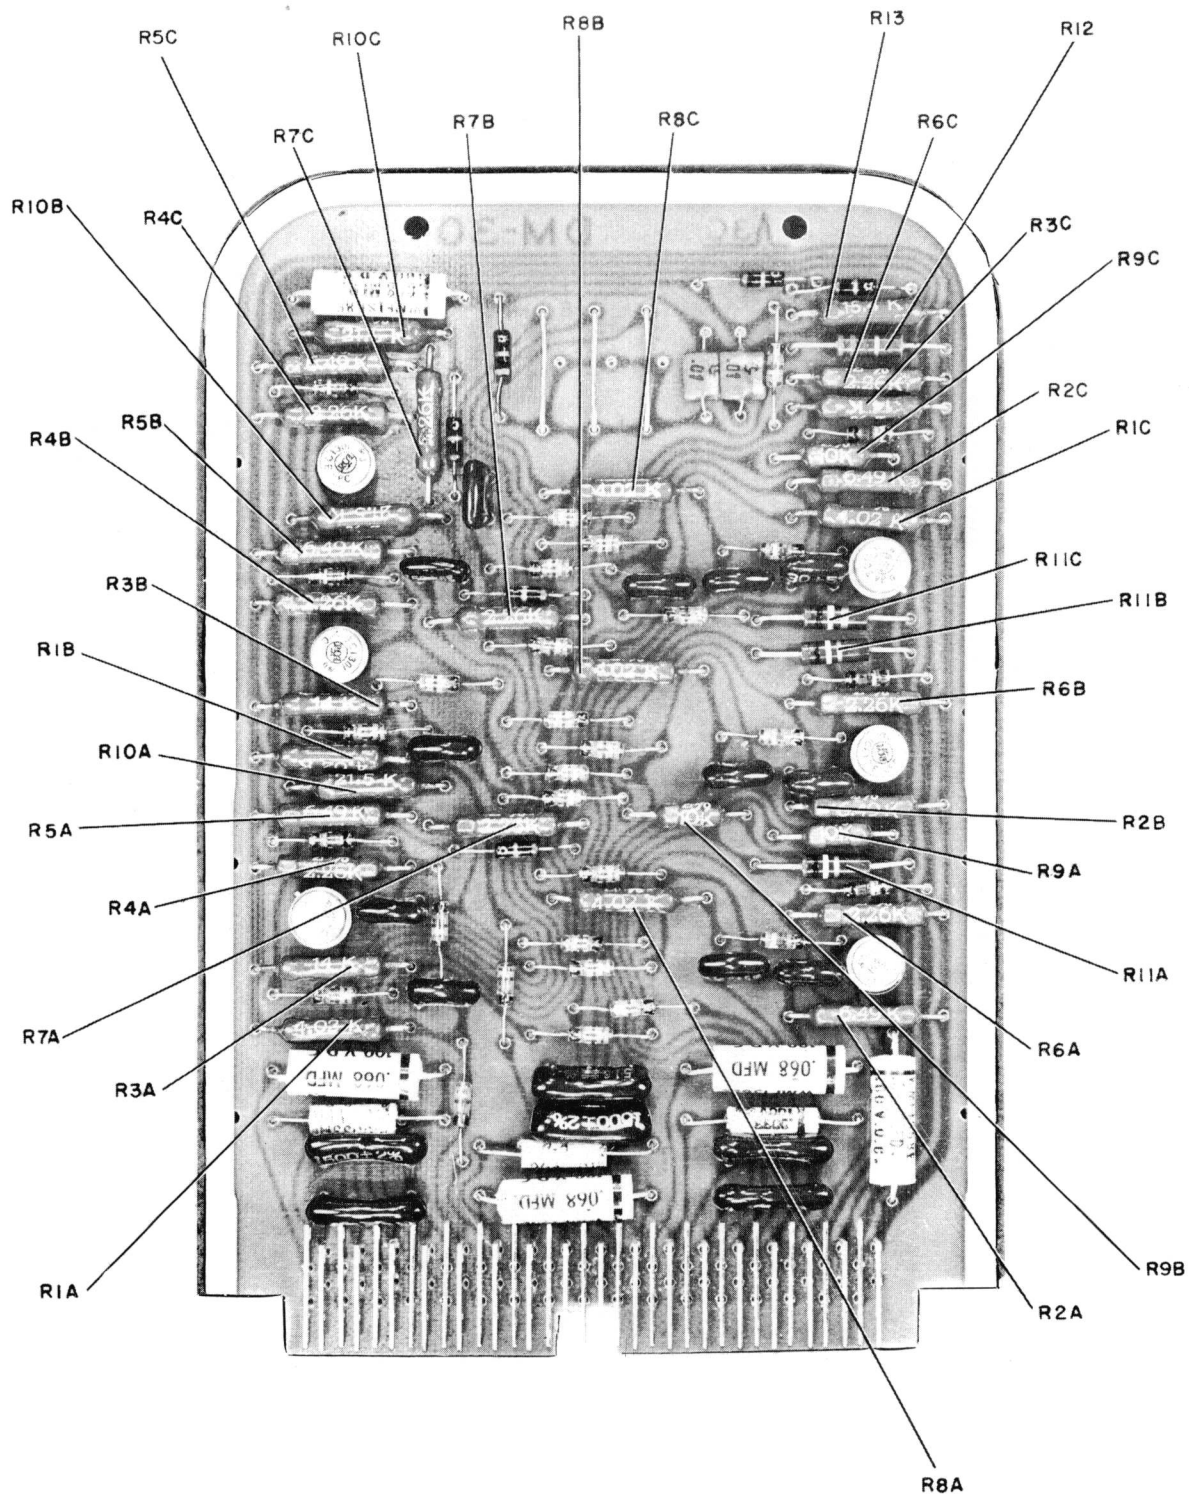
Delay Multivibrator/Pulse Shaper PAC, Model DM-30, Parts Location (Resistors)
